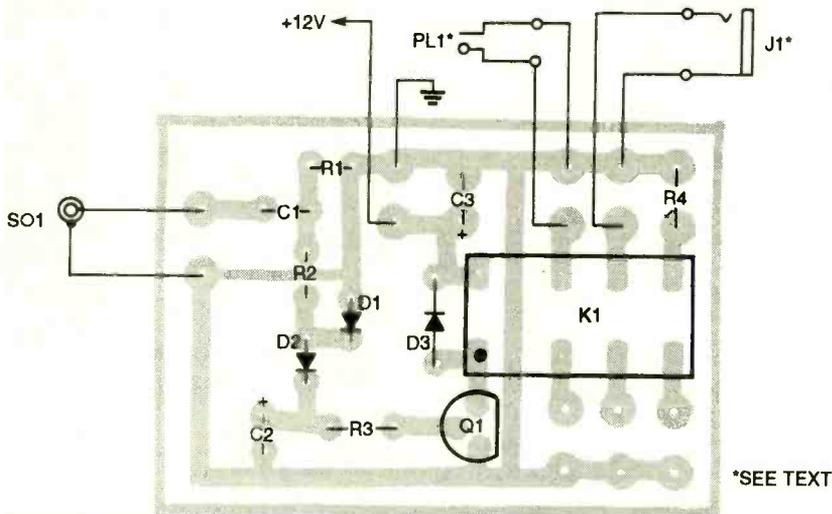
Once you have etched your board and obtained all of the components listed in the Parts List, assemble your unit using this parts-placement diagram as a guide.
